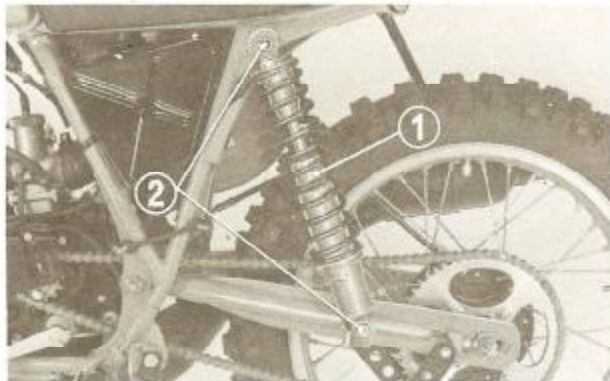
(1) Rear shock absorber (2) Attaching bolts
